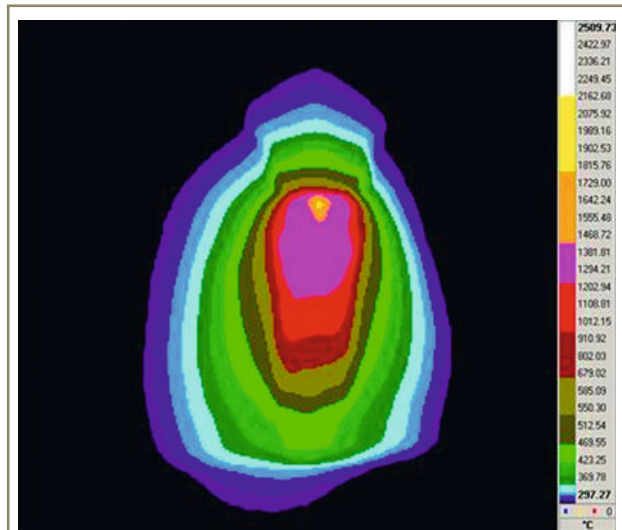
Typical recomposed IR thermal image of a GTA weld pool
